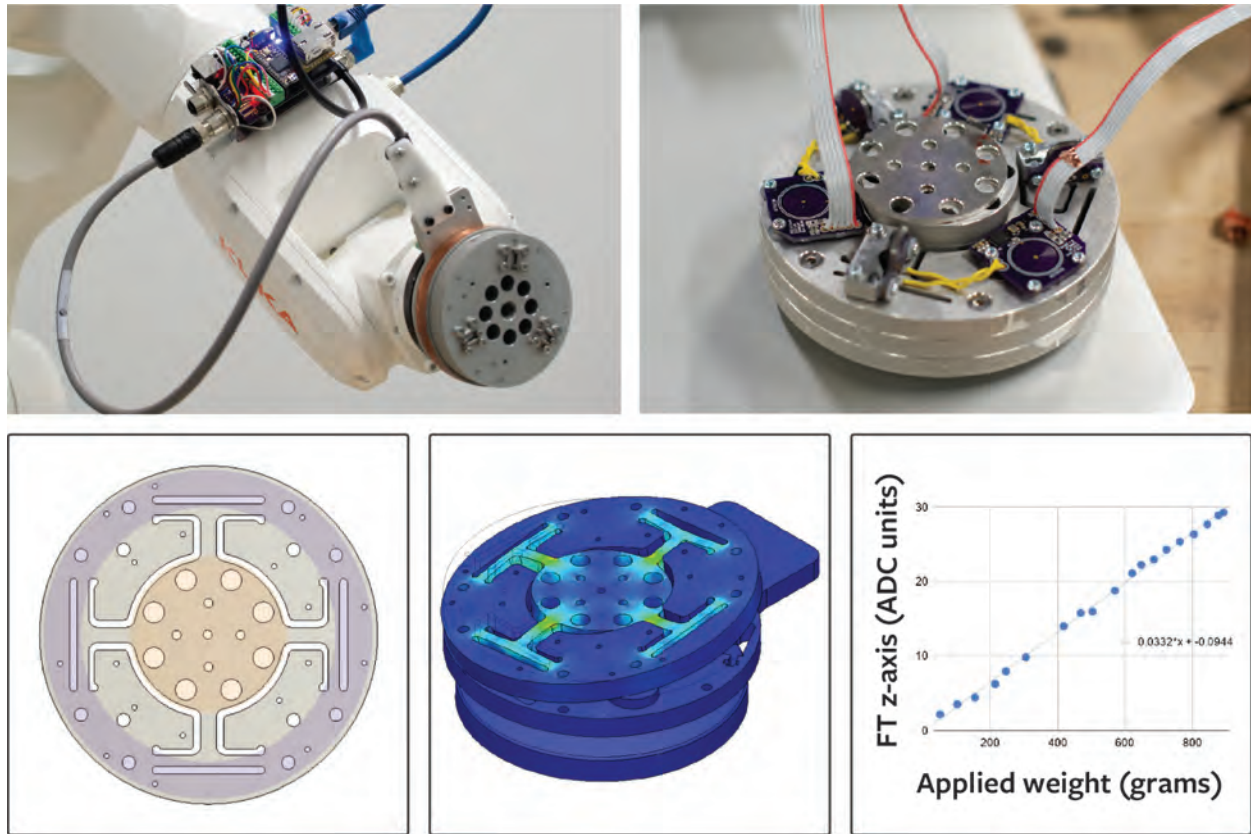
(A) Force torque sensor mounted to the end of the robot. (B) Inside view of the force torque during assembly. Each of the printed circuit boards contain a spiral inductor for distance sensing. (C) Flexure detail. The center disk (highlighted orange) is attached to the wrist of the robot, and the outer ring (highlighted purple) is attached to various end effectors. These rings are joined by thin T-shaped flexures which are designed to elastically deform. (D) FEA studies of the force torque sensors help ensure that applied forces and resulting deflections are measurable by our sensors and tolerable by the material. Displacements are exaggerated. (E) Plot of z-axis signal response with respect to applied weight.
